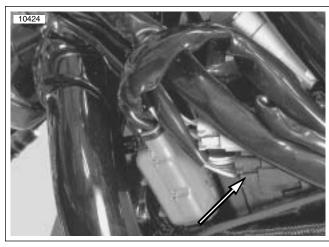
Right Switch Housing Connector [22] (typical) (VRSCA shown)
